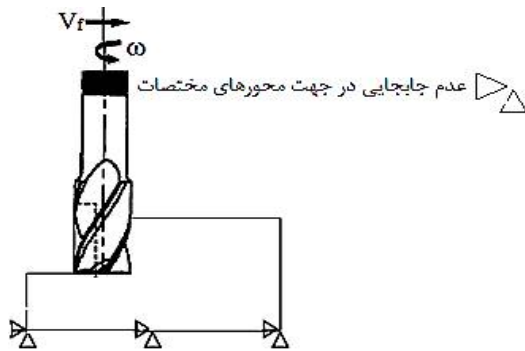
Boundary conditions applied to tool and workpiece in milling process
